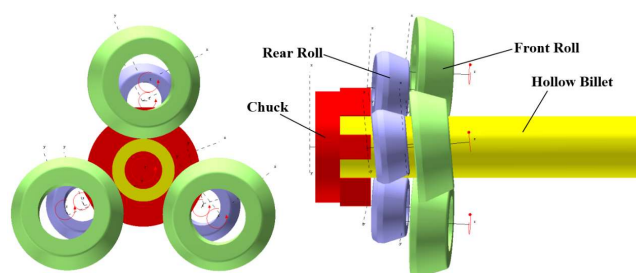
Principle of local loading axial forming of multi-roll skew tandem rolling
